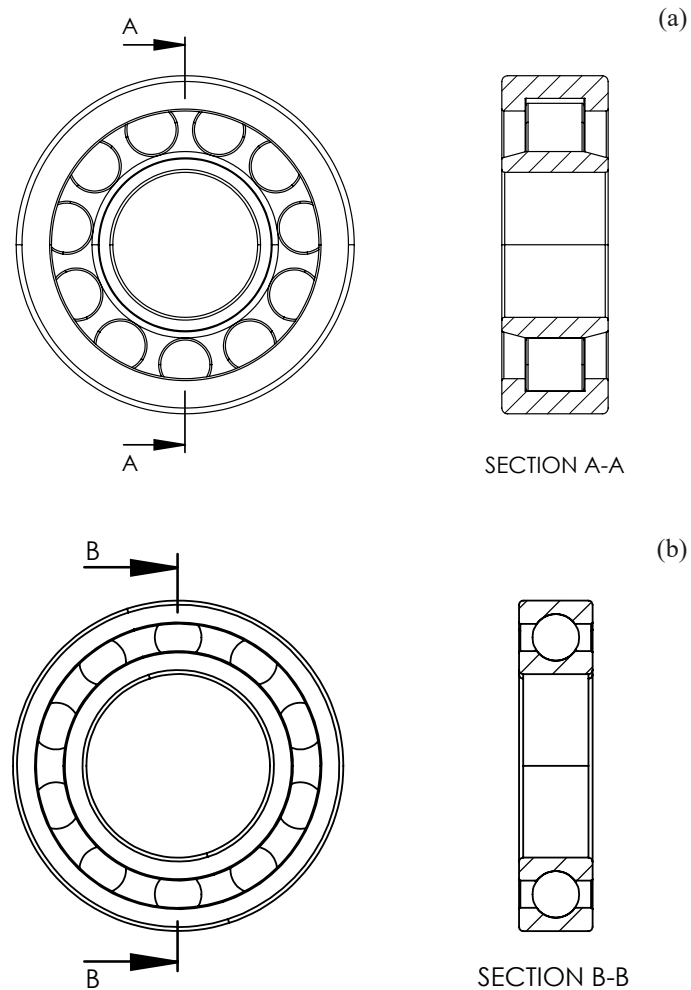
Geometry of the roller bearing taken as reference for the investigation: (a) cylindrical roller bearing *NU 202 ECP*; (b) deep-groove ball bearing model *6210*.
